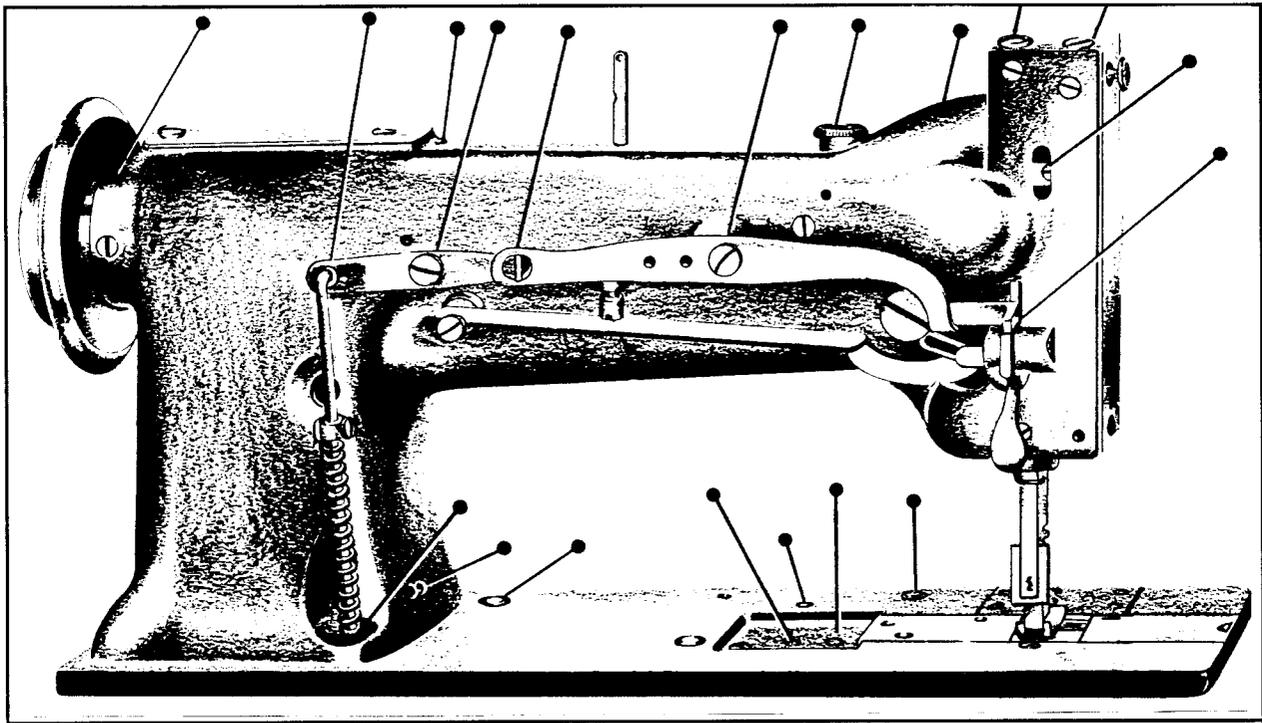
This drawing shows the oil points seen from the back of the machine. The oil points for the presser foot assembly linkage are less critical than other oiling points.
